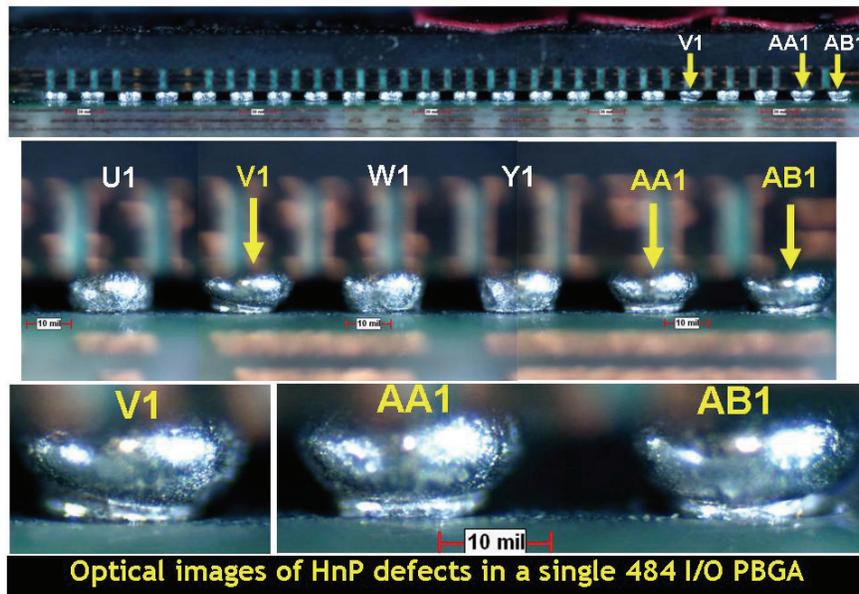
Optical images of multiple HnP defects in a single 484 I/O PBGA.
